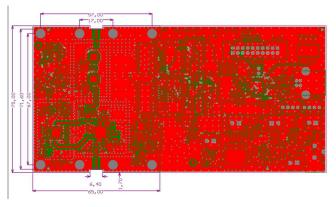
Printed circuit board layout of proposed electronic control board with labeled dimensions of front end part.
